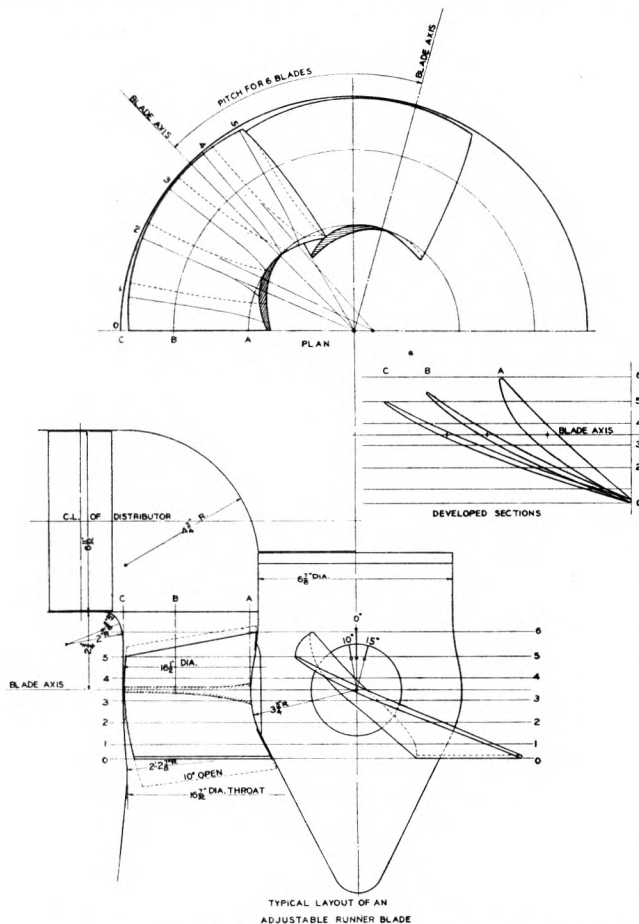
TYPICAL LAYOUT OF AN ADJUSTABLE RUNNER BLADE
